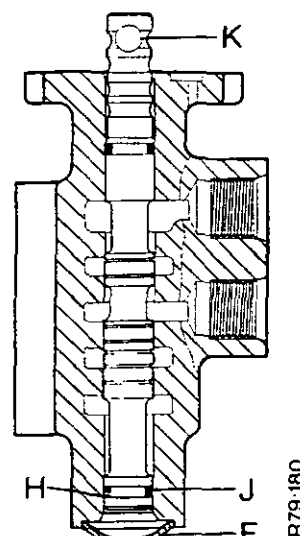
ASSEMBLY OF THE THREE-WAY VALVE
